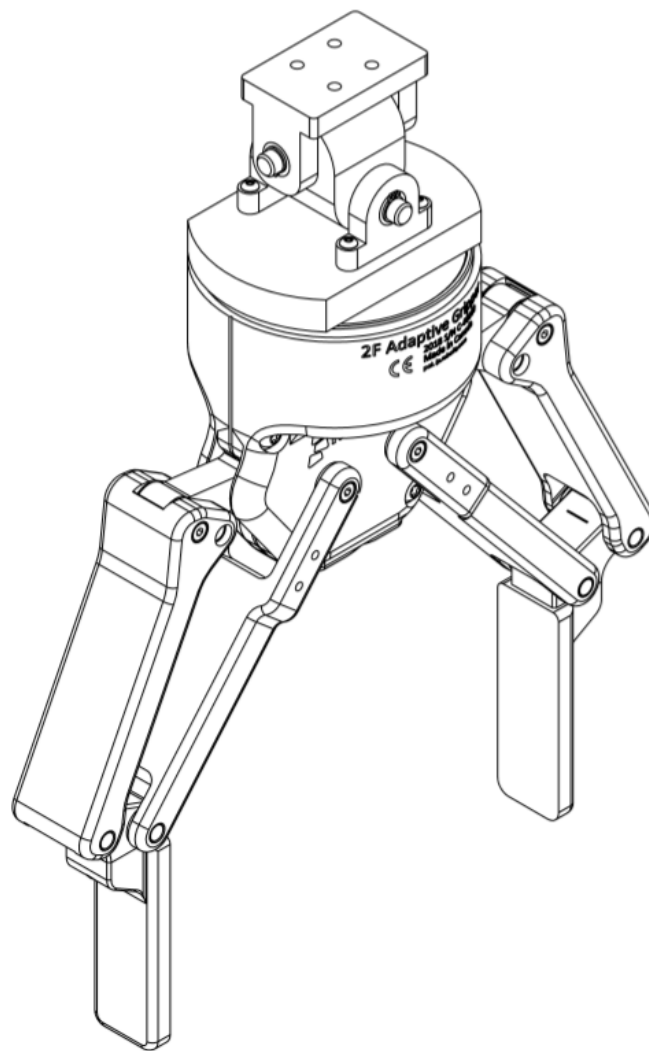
The Robotiq 2-finger parallel gripper can be installed on the center joint and controlled via the electric module on the tool changers.
